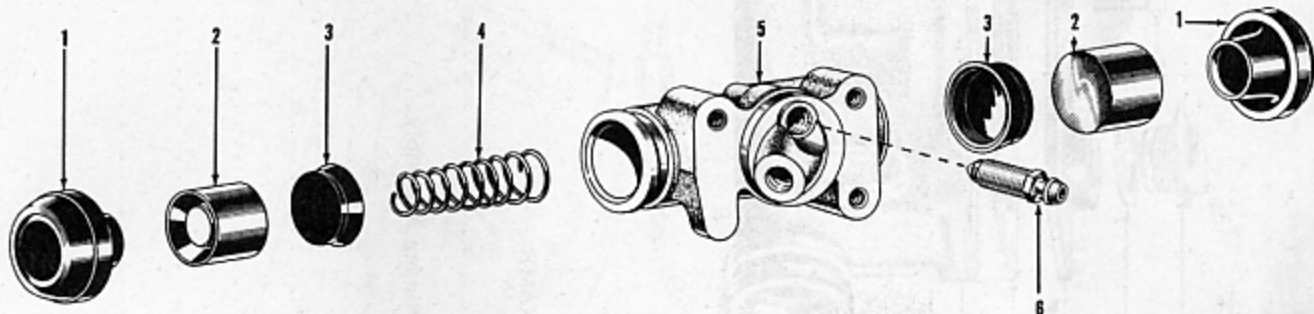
FRONT WHEEL BRAKE CYLINDER—EXPLODED VIEW
